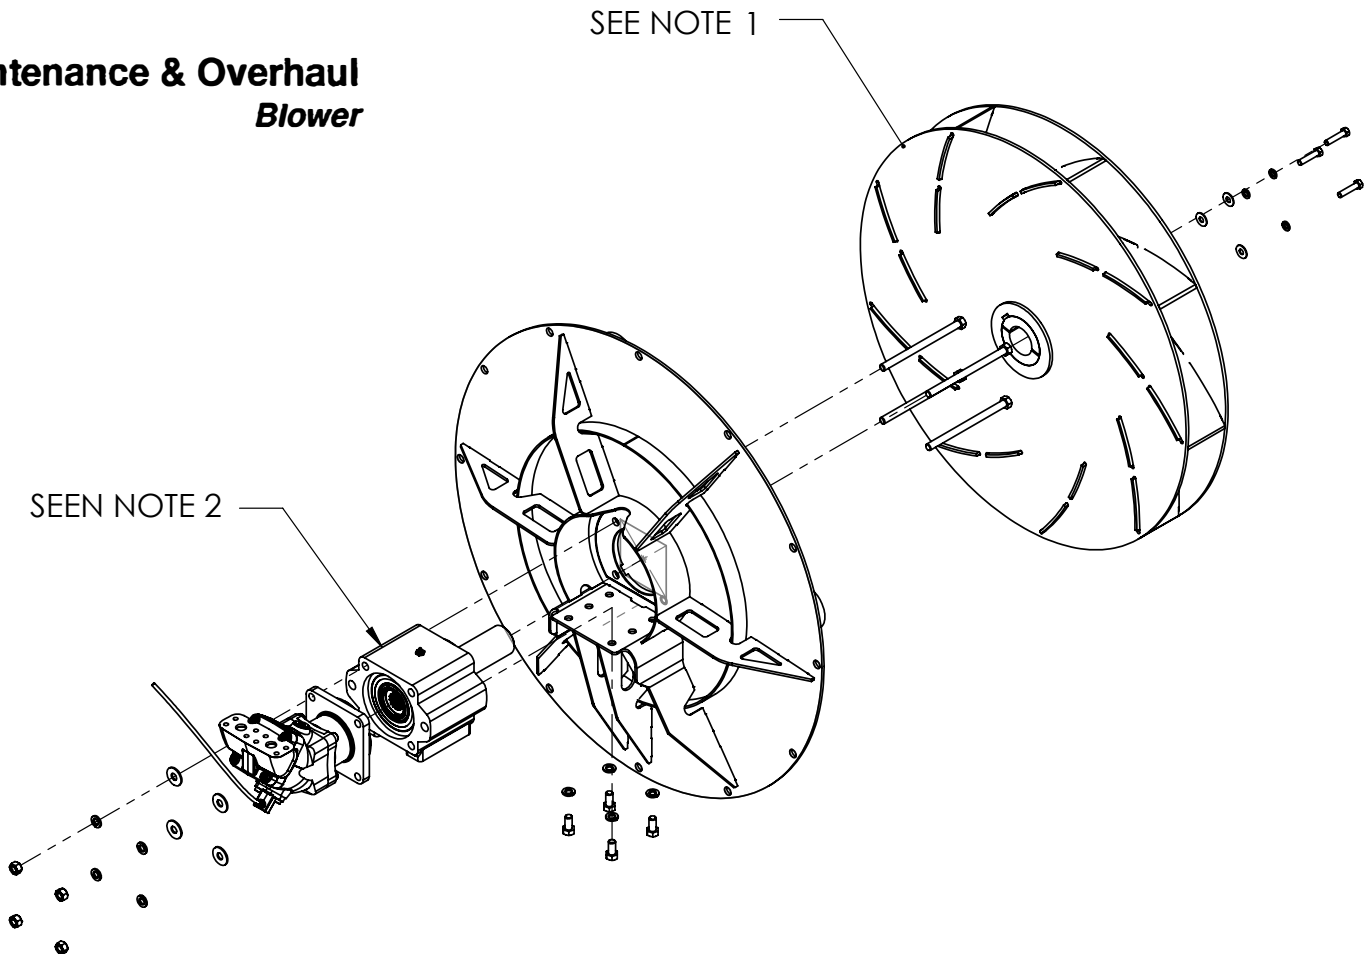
Blower Impeller puller is 6" x 2" x 1/2". Holes are 4" apart and .56" diameter. Do not force impeller off of shaft. Damage to both shaft and impeller could occur.
